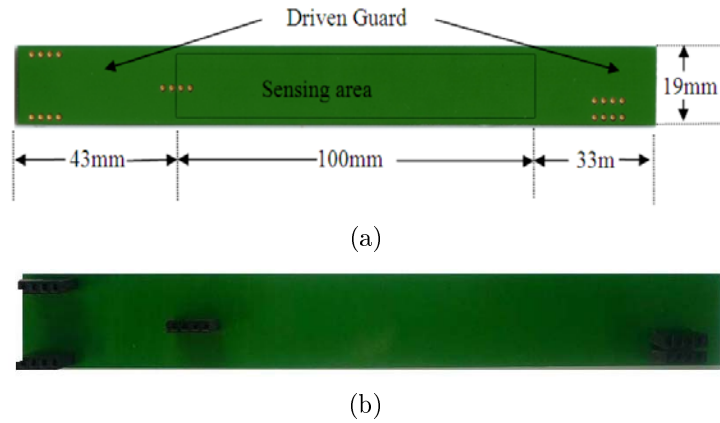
(a) Top of view electrode plate, (b) PCB sockets mounted onto bottom electrode plate
